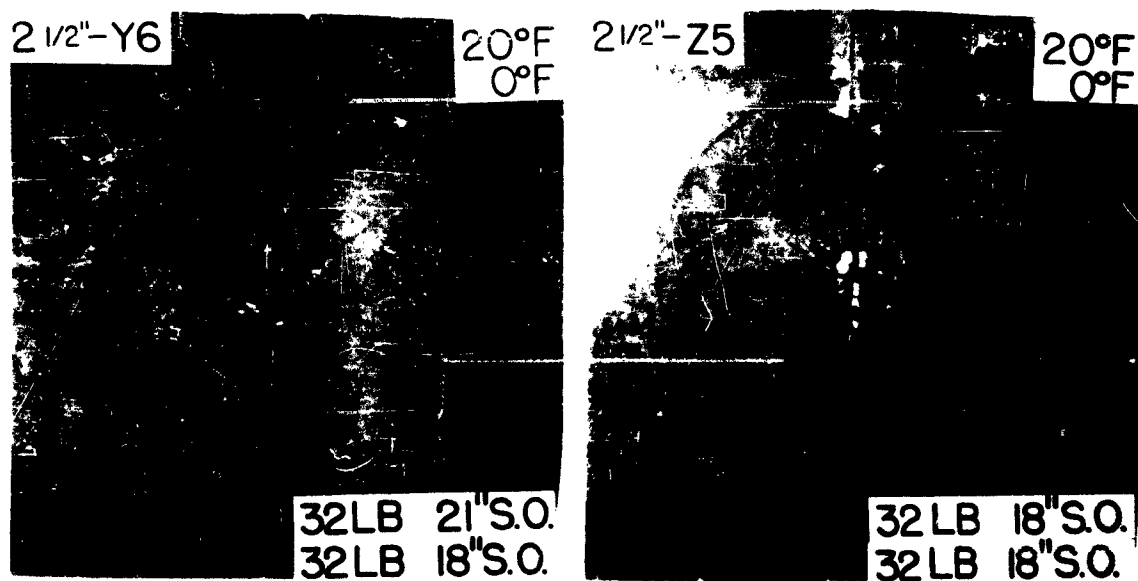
Crack-starter explosion-bulge test plates of 2-1/2-in. thick low-alloy HY-80 given two test shots. Both plates developed extensive brittle fractures in the plate metal on the second shot.
